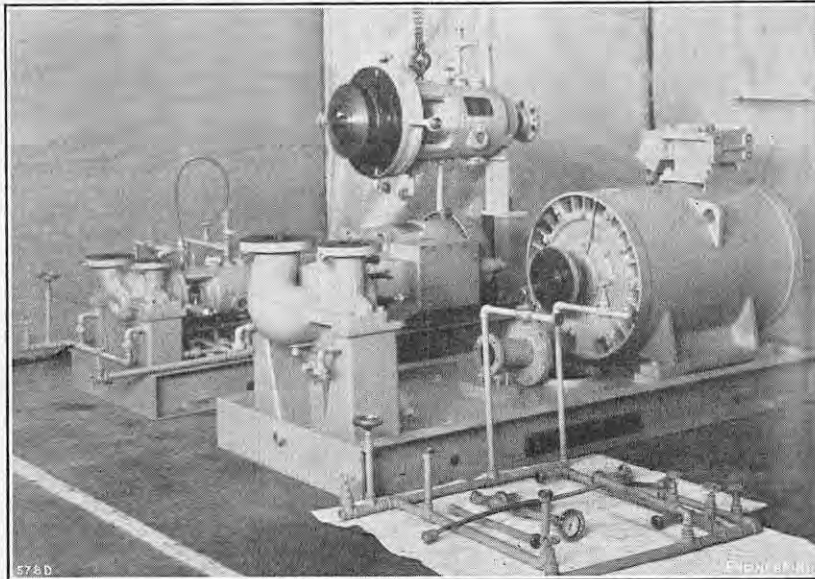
SINGLE-STAGE SINGLE-ENTRY IMPELLER PUMPS.
